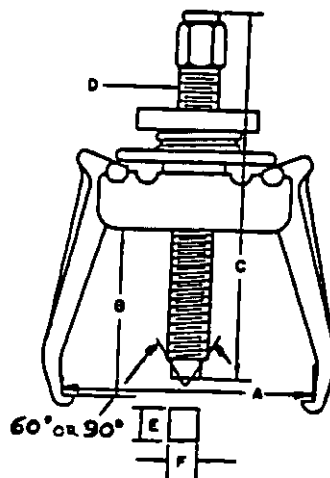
Type I, class 3, puller, mechanical, gear and bearing, two-jaw, external and internal. (See Table III or size specification.)
